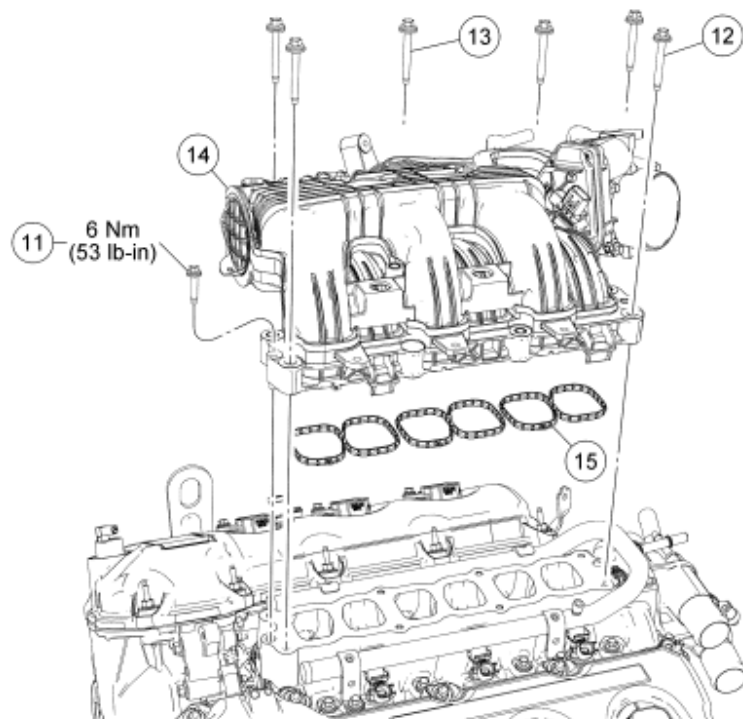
Upper Intake Manifold Components With Torque Specification (2 Of 2)
